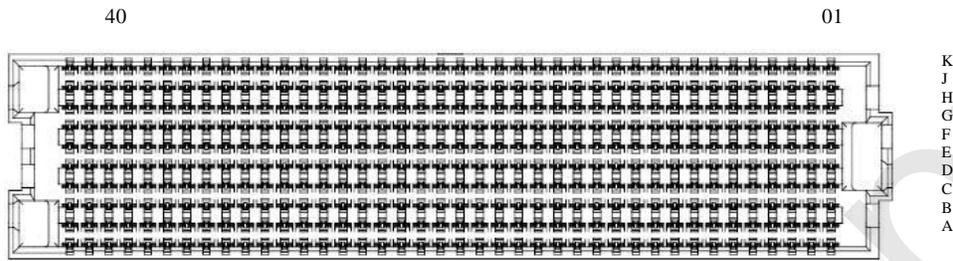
Carrier Card Connector Grid Labeling (Component Side View)
